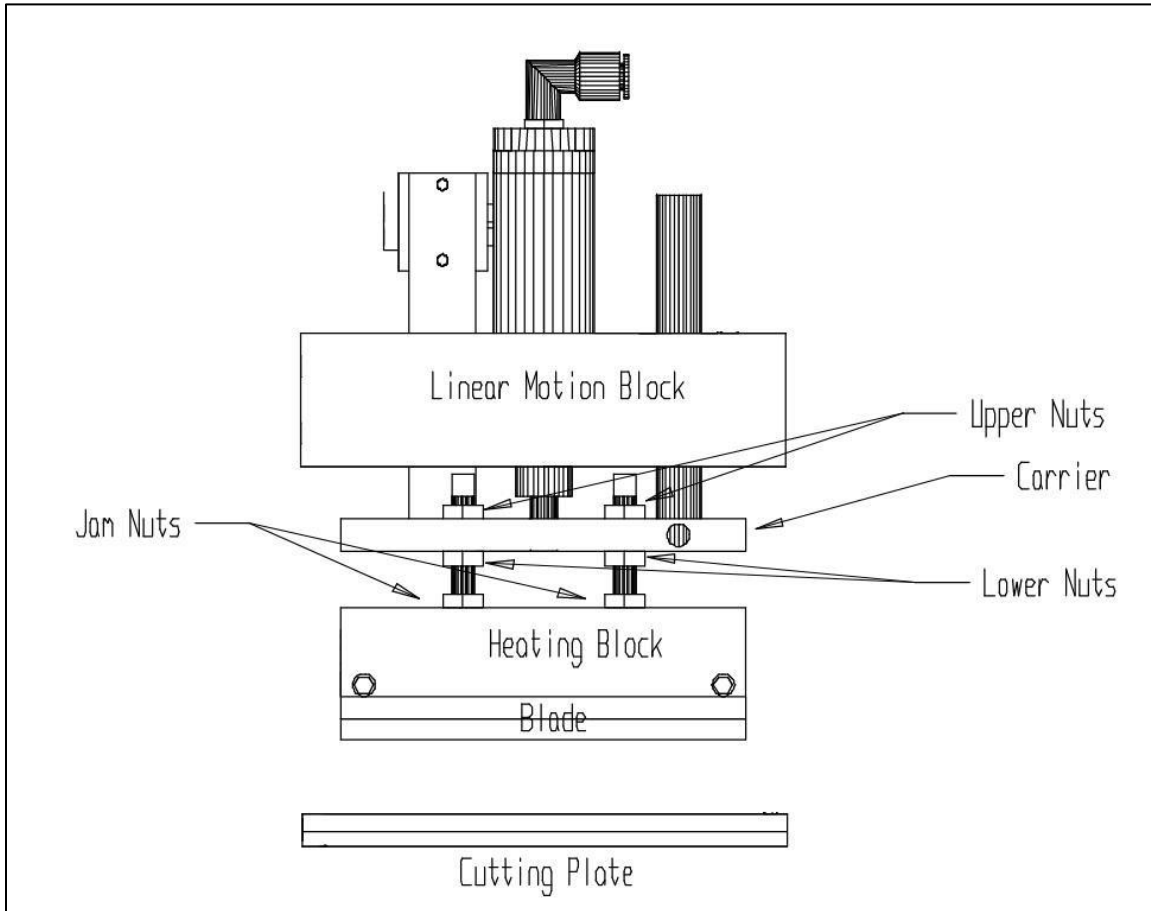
An outfeed side view of the hot knife assembly, with parts labeled
